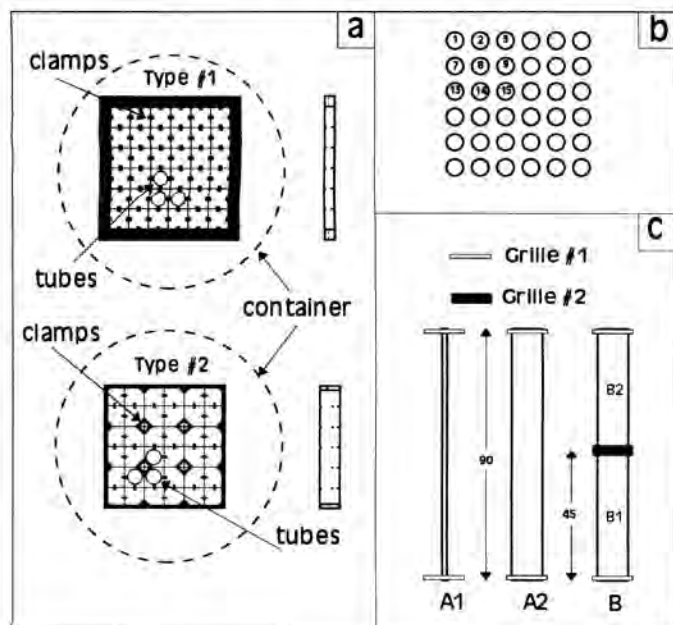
Schematics of: a) grilles; b) tubes; c) configurations.
